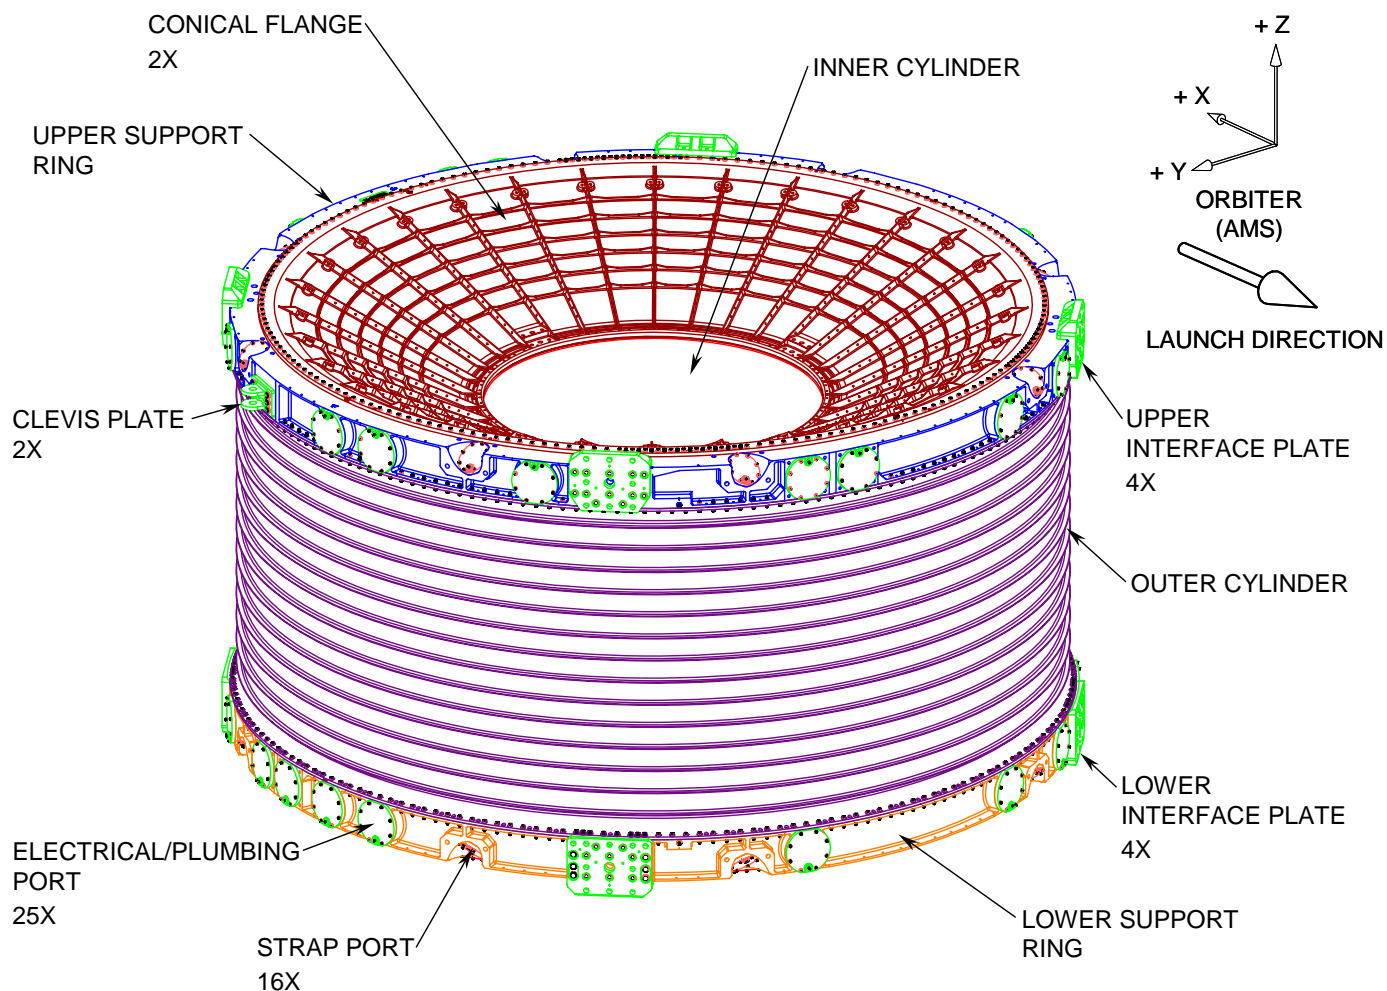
Vacuum Case Assembly (NASA Delivered)
